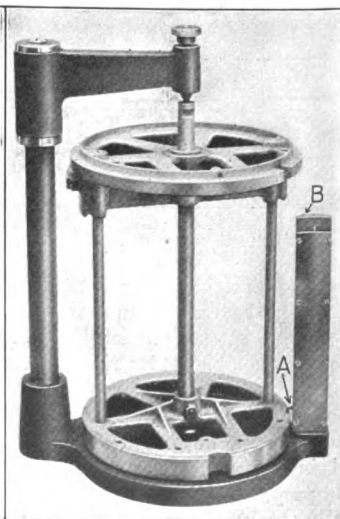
TESTING SQUARENESS OF HEAD WITH SPINDLE
